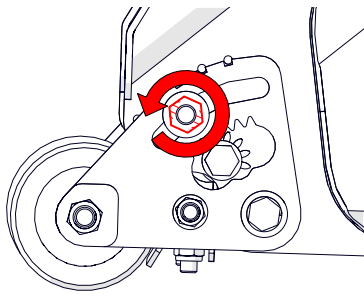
E - Loosen the top clamp nut of the roller quadrant
